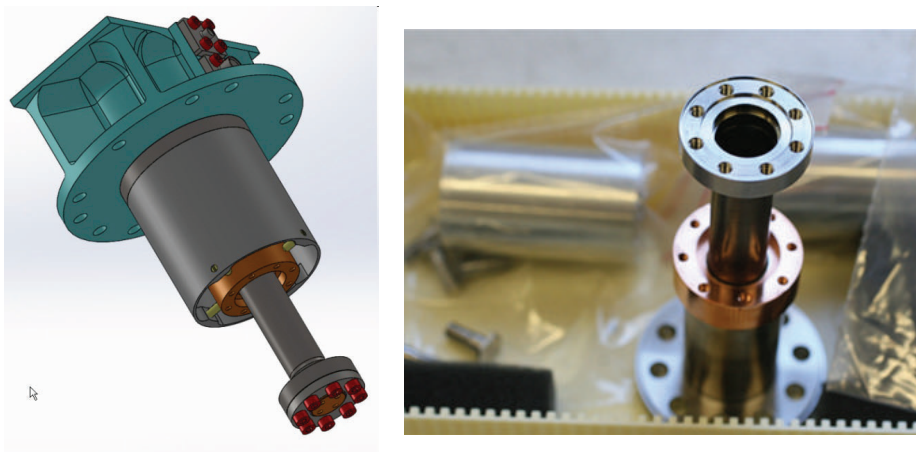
CAD drawing of the dismountable coaxial cold finger (left) and assembled cold finger open with the second stage cold end removed (tube of the second stage not yet in place) (right).
